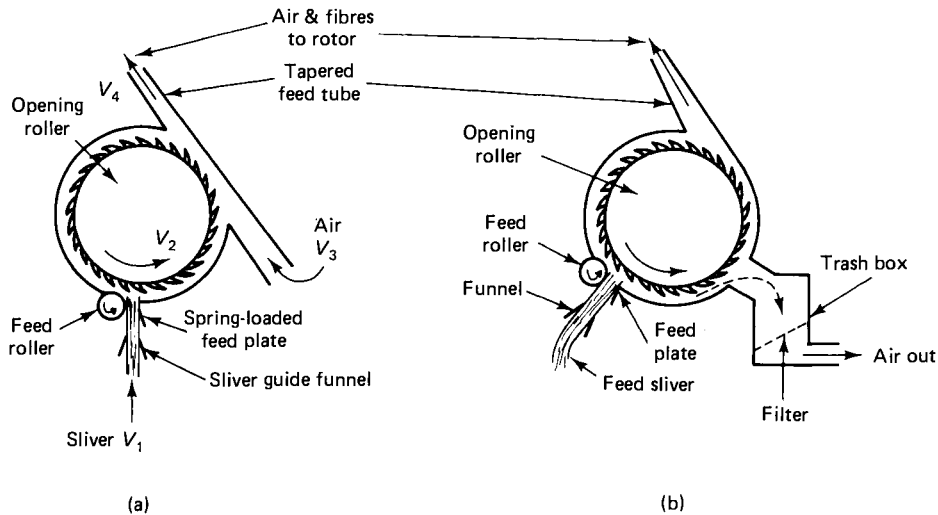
Opening roller arrangements: (a) simple opener feed; (b) trash removal feed
